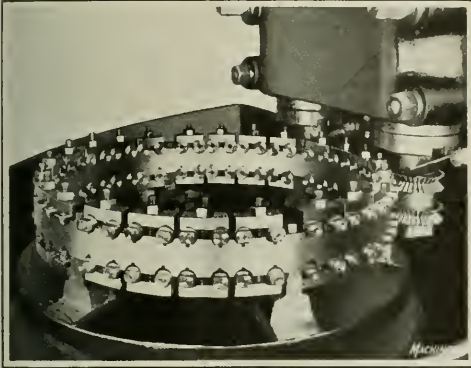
Operation in which One End of Camshaft Thrust Blocks is flattened and beveled
